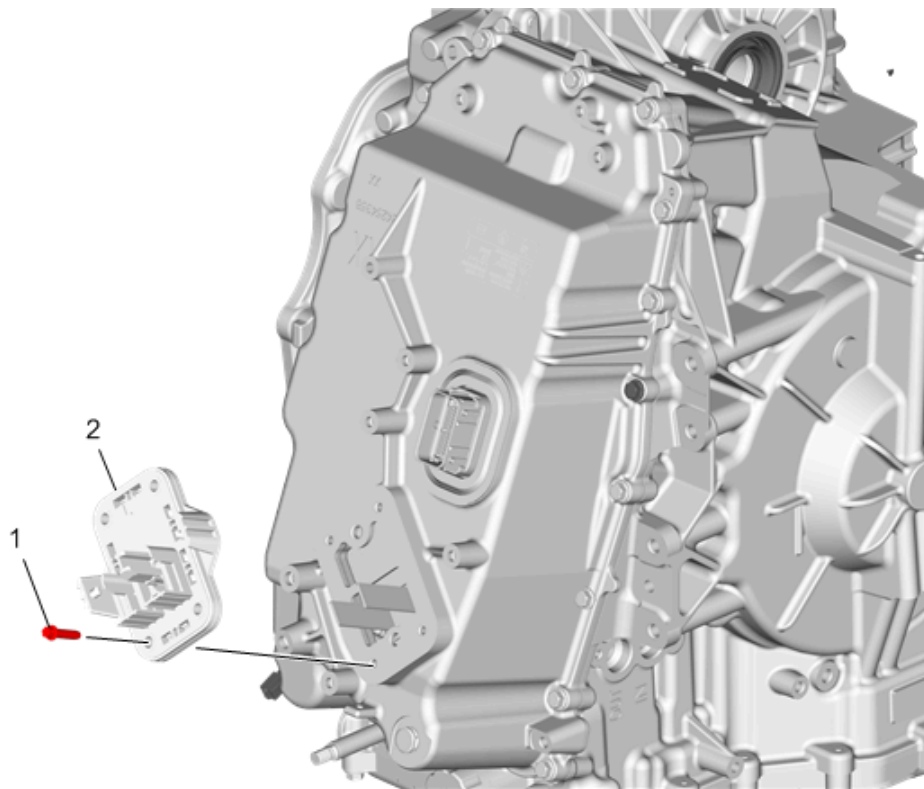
Drive Motor Battery Positive And Negative Cable Connector
